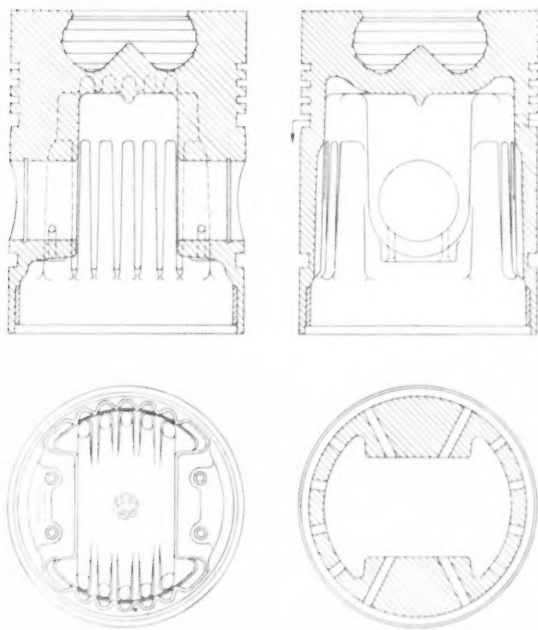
A 4 1/2 in diameter piston with a stepped shrouded toroidal bowl
